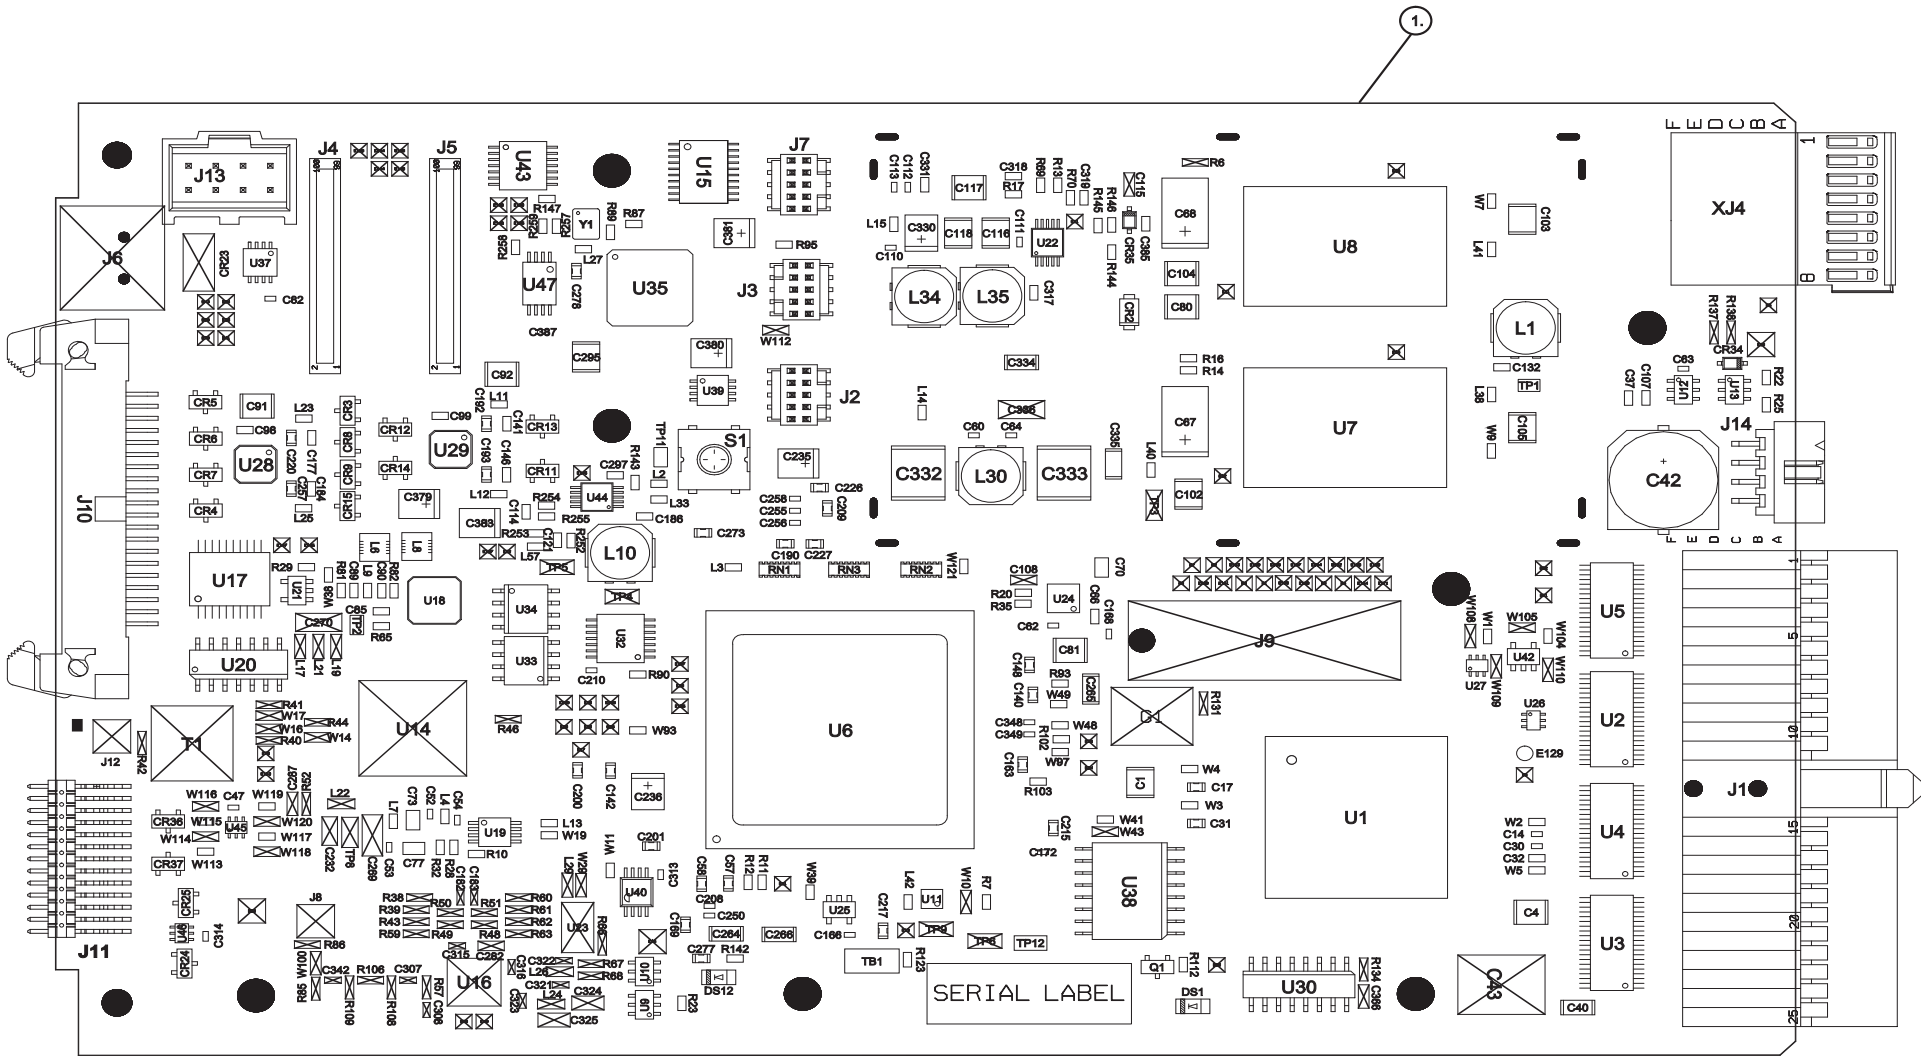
AI T-8000 RF Receiver PCB Assembly (A1A2A2A2A1)
